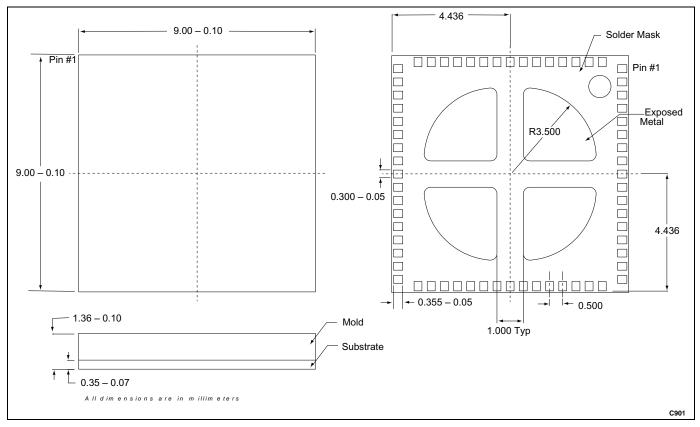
CX74017 64-Pin LGA Package Dimension Drawing
